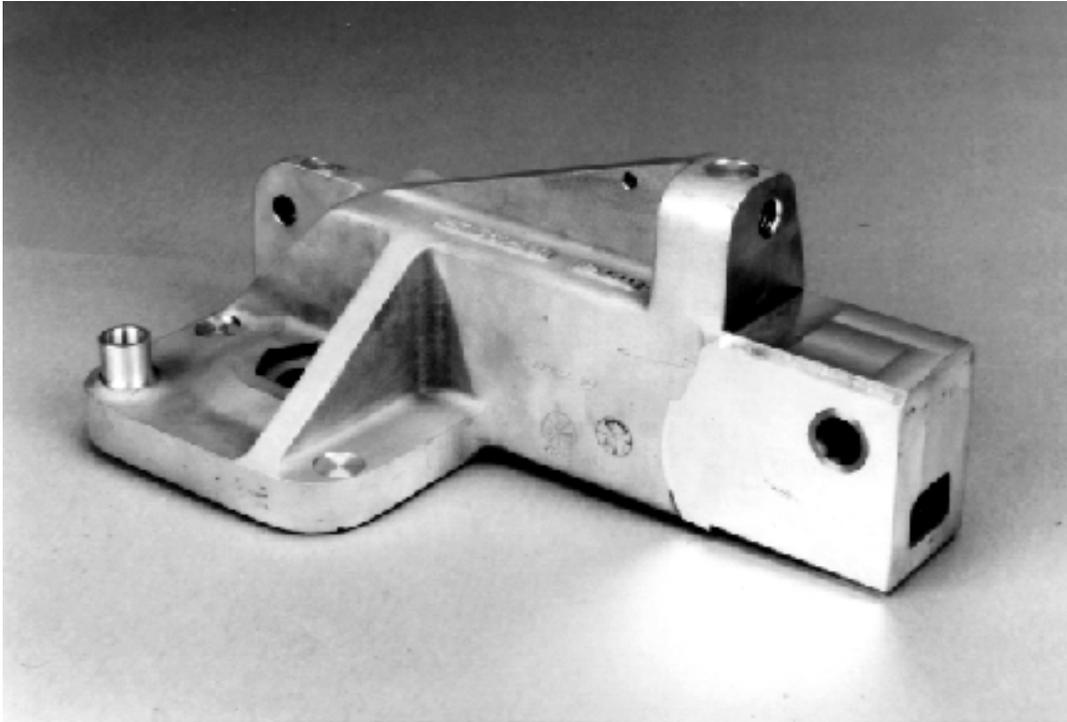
Prototype of a stronger castor mounting bracket (A357-T6).
